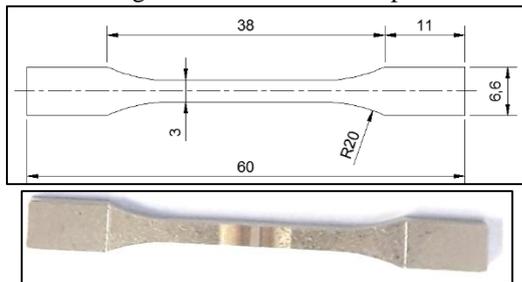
Flat sample dimensions (upper) and real sample (lower)
